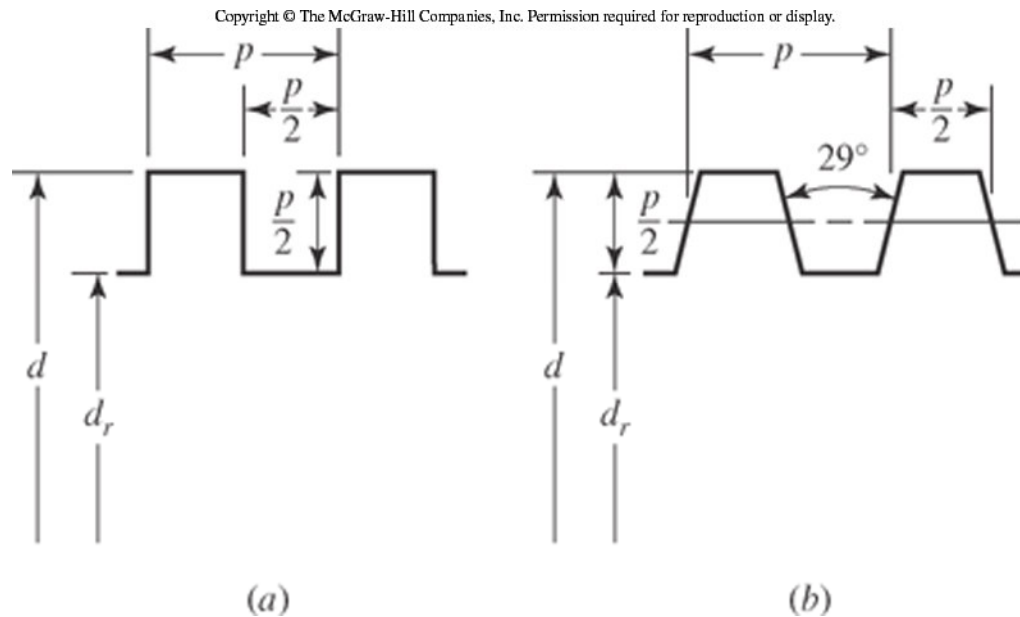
Power Screws (a) Square thread,(b) Acme thread
